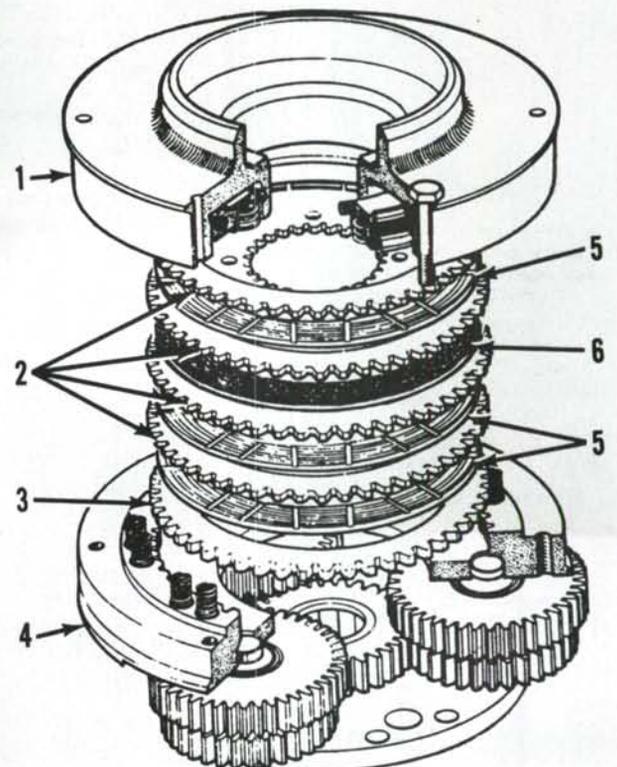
Install backing plate, grooved bronze clutch plates, smooth bronze clutch plate and thin steel clutch plates for rear planetary clutch in sequence shown.
